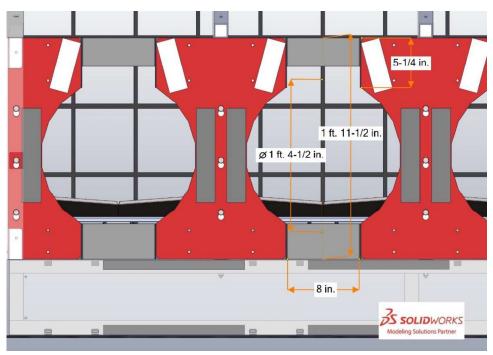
CARGO SHIP HATCH geometry and dimensions.
